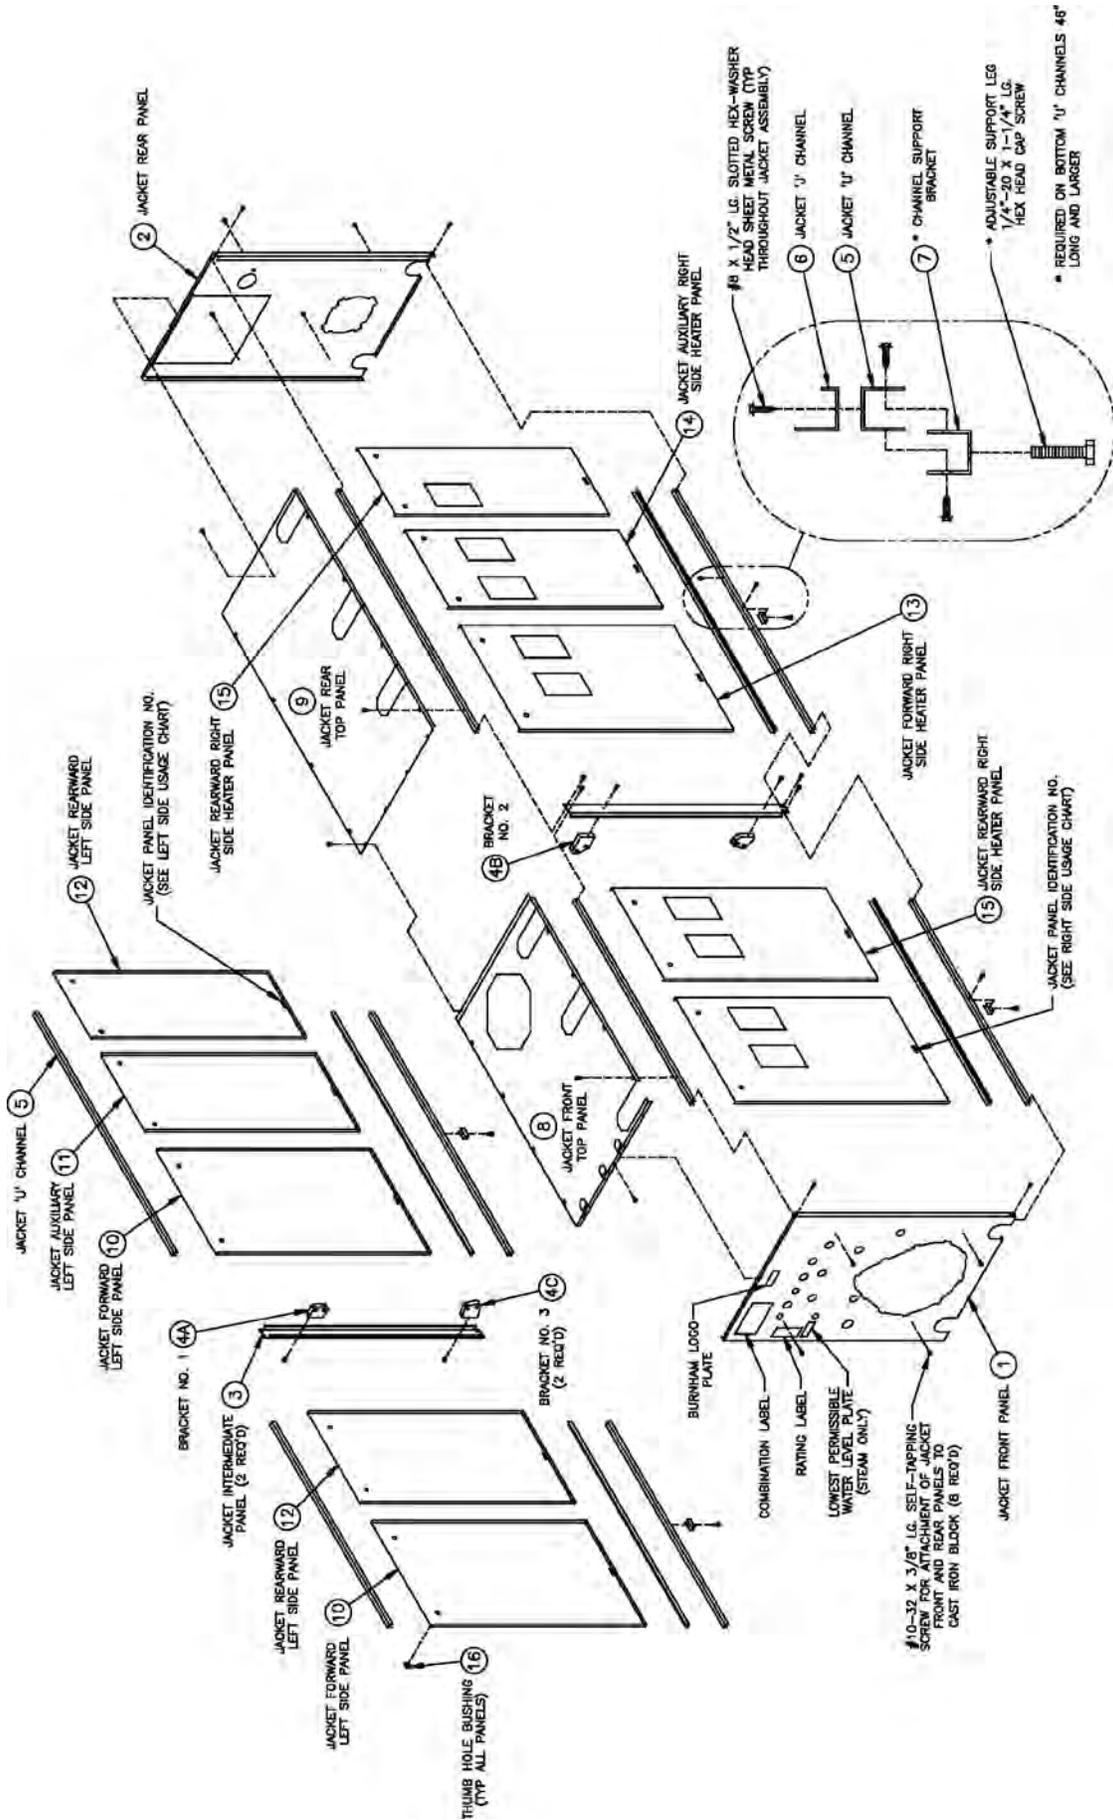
V11H Series Jacket Assembly (Boiler Models V1113H Thru V1123H)
